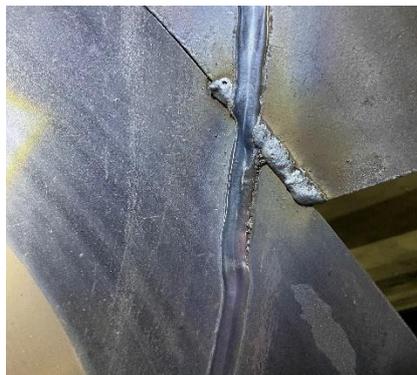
Robotic welding done offset with pipe edge.
